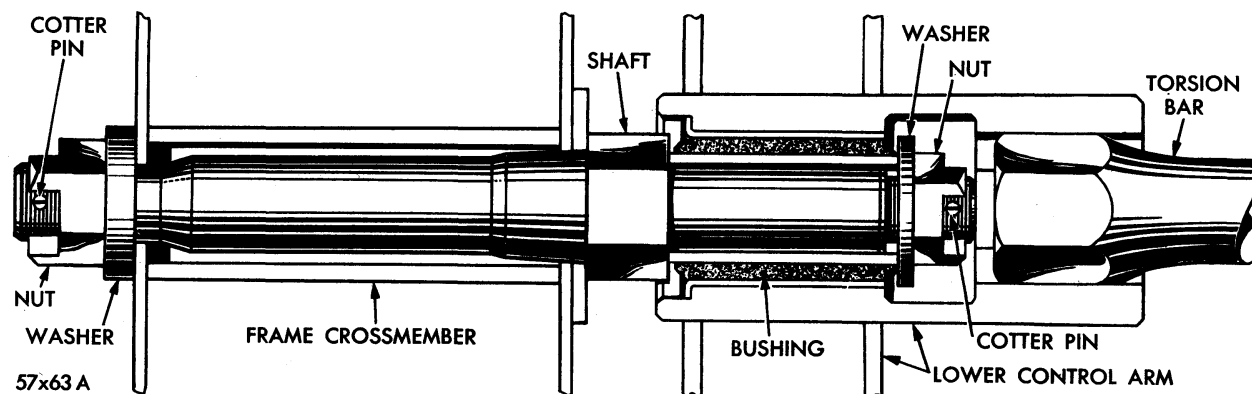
Lower Control Arm Pivot Shaft and Bushing Assembly
